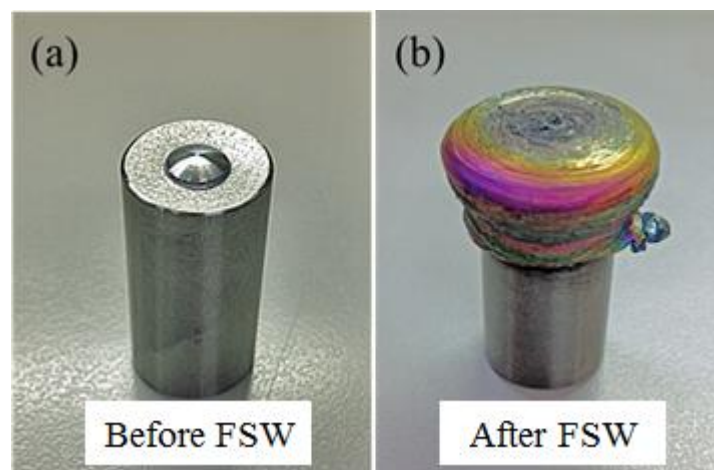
Appearances of FSW tool with excess heat input condition (450 rpm, 100 mm/min), (a) before and (b) after FSW.
